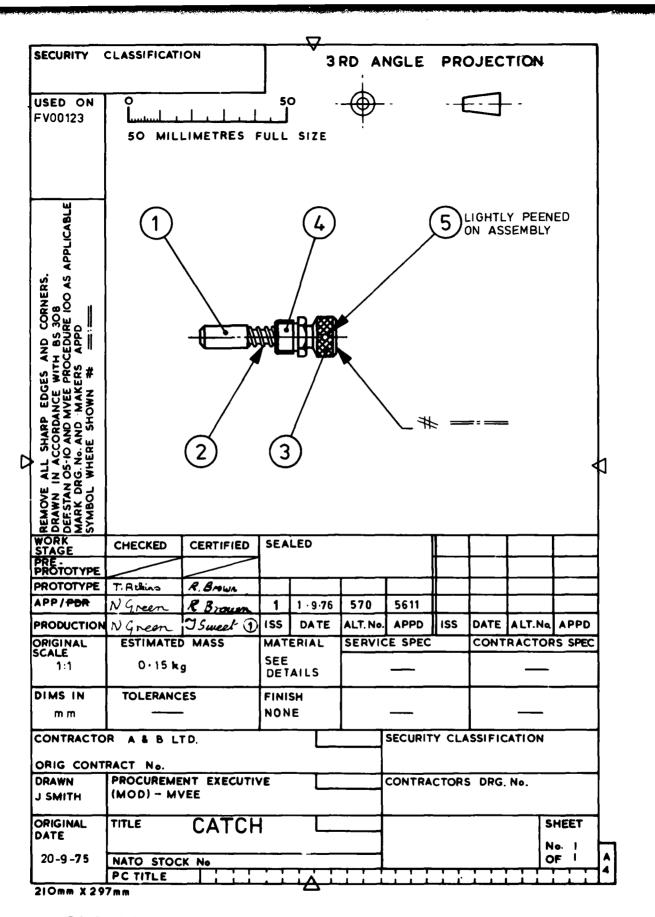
SUB-ASSEMBLY DRAWING FOR FIG. 1 (illustrating Section 5.1)
